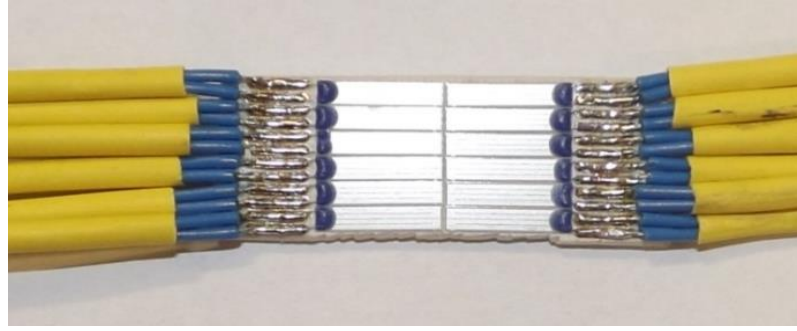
Twelve microheaters circuit welded on PCB board with the wiring.
